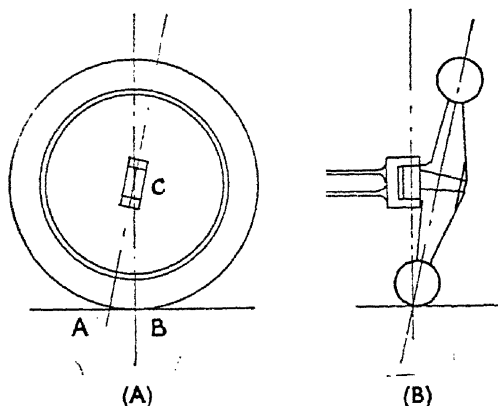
The Castor Type of Steering (A), and the method of inclining the stub axles to reduce steering drag (B).
